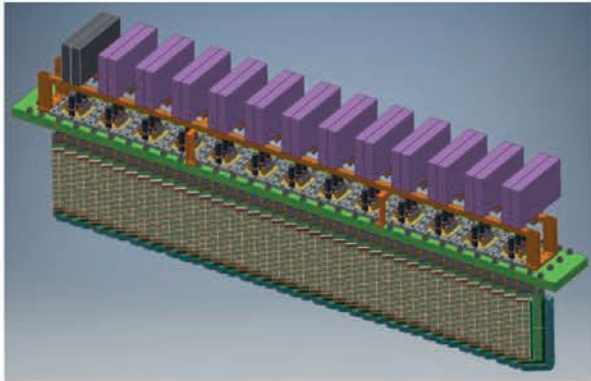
3D view Sketch of the arrangement of the towers covering the full MAGNEX focal plane
